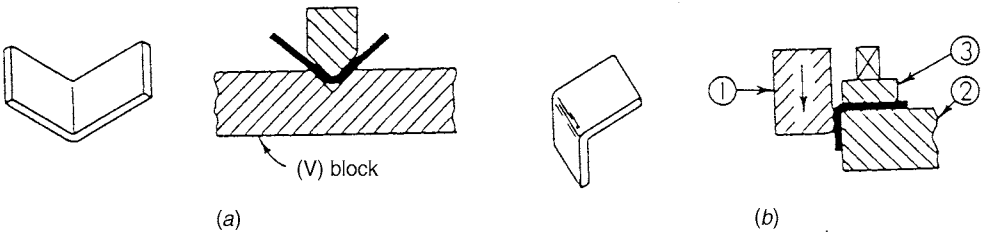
Bending methods: (a) V bending and (b) edge bending.
